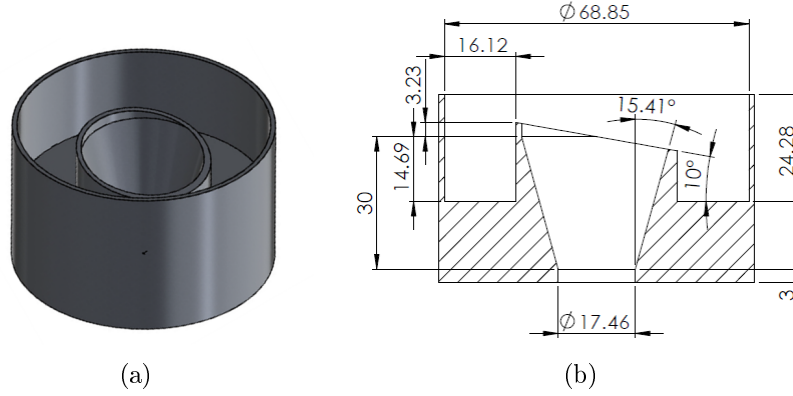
The proposed tapered horn antenna with coaxial cavity design layout and details. (a) Prospective view. (b) A cross section view to the design details along the horn tapering with all dimensions in millimeter.
